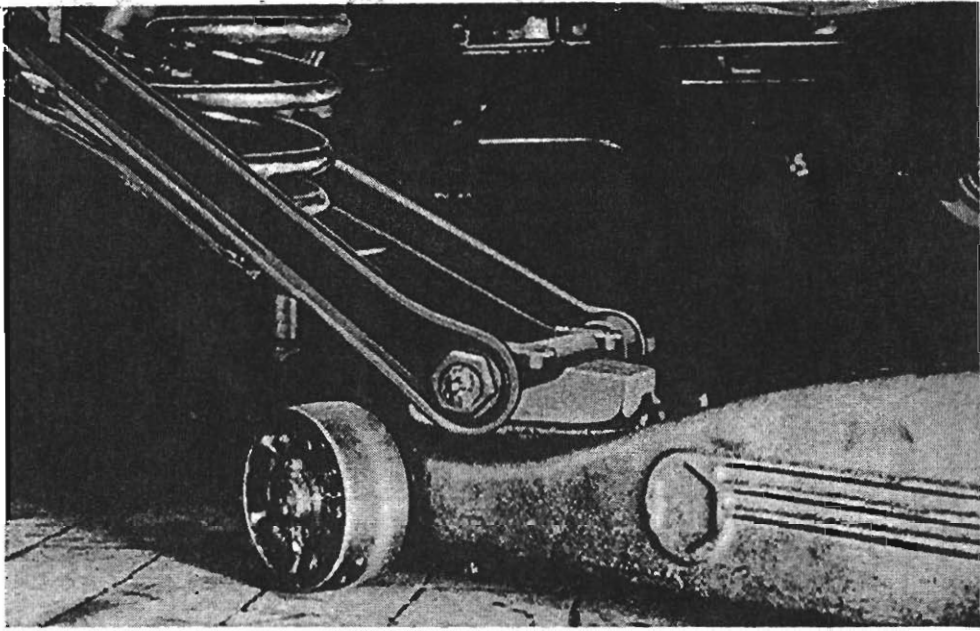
Note the Grooved Block in the Saddle of the Adjustable Jack.
